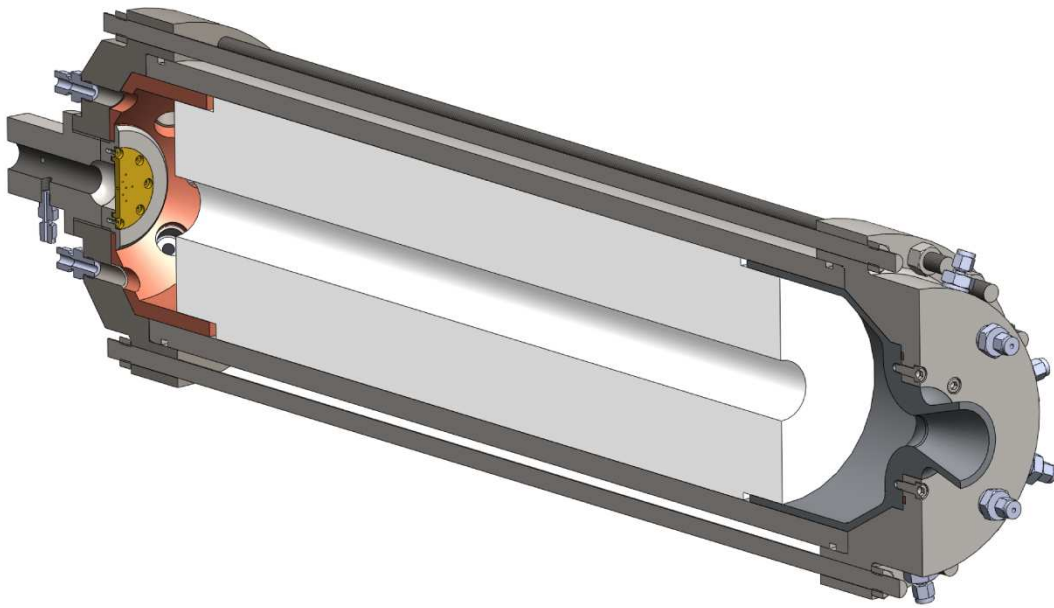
ZEpHyR main engine EM, CAD cutaway model
